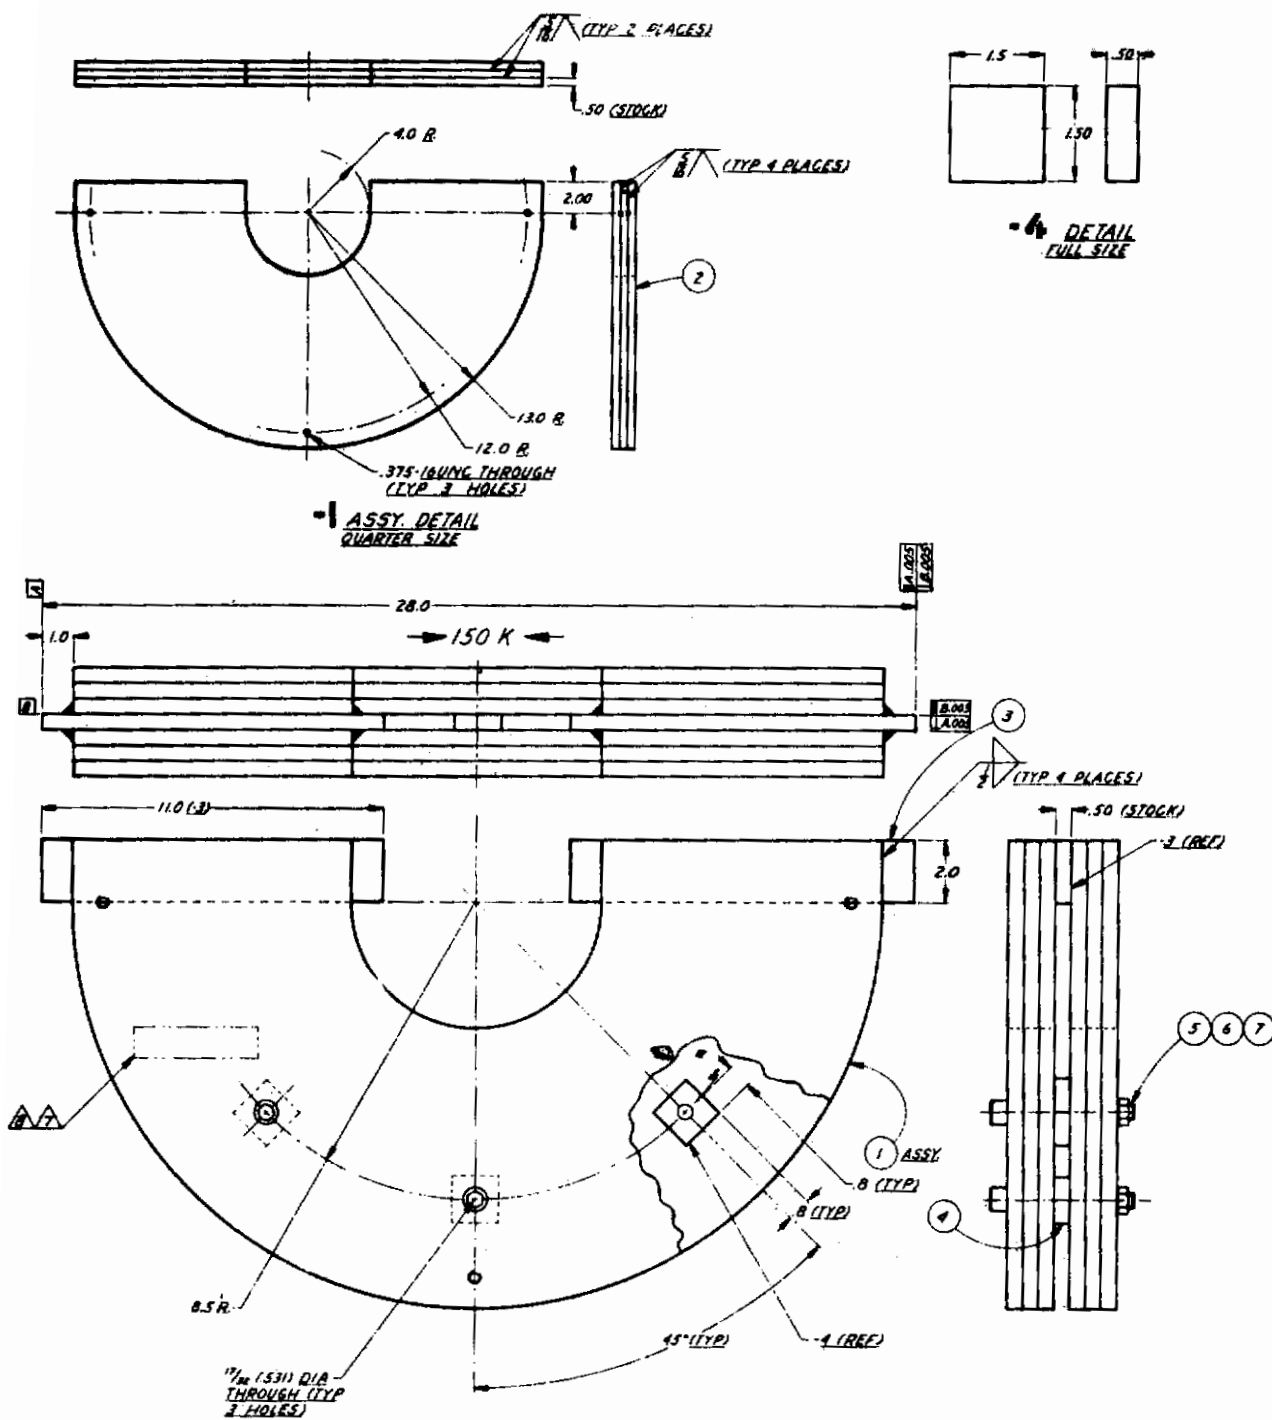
U-Bar Weld-Restraint Fixture
